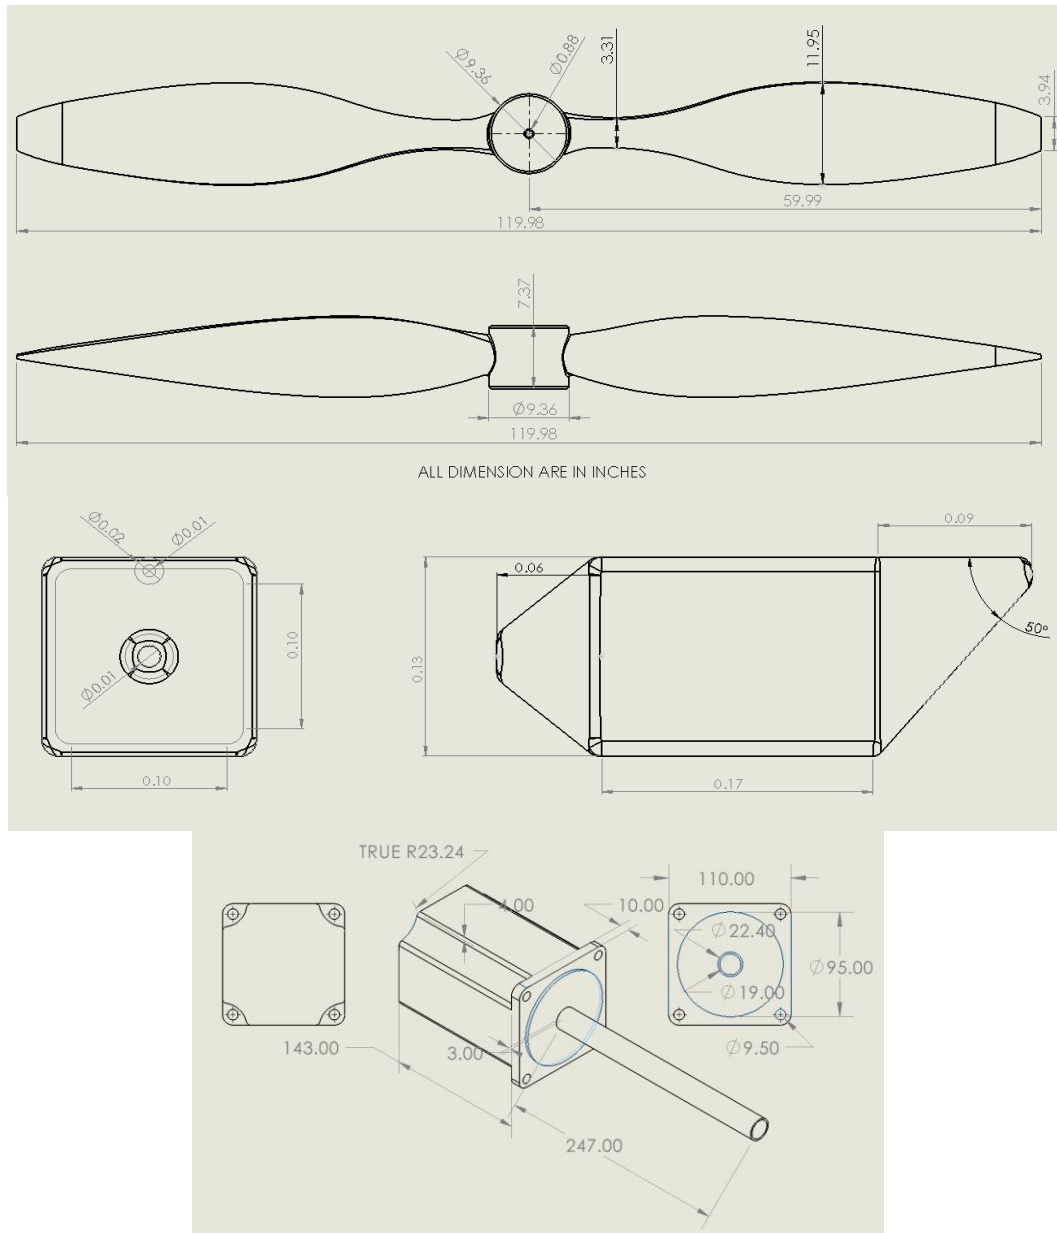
CAD drawing of (top) propeller, (middle) motor casing, (bottom) motor
